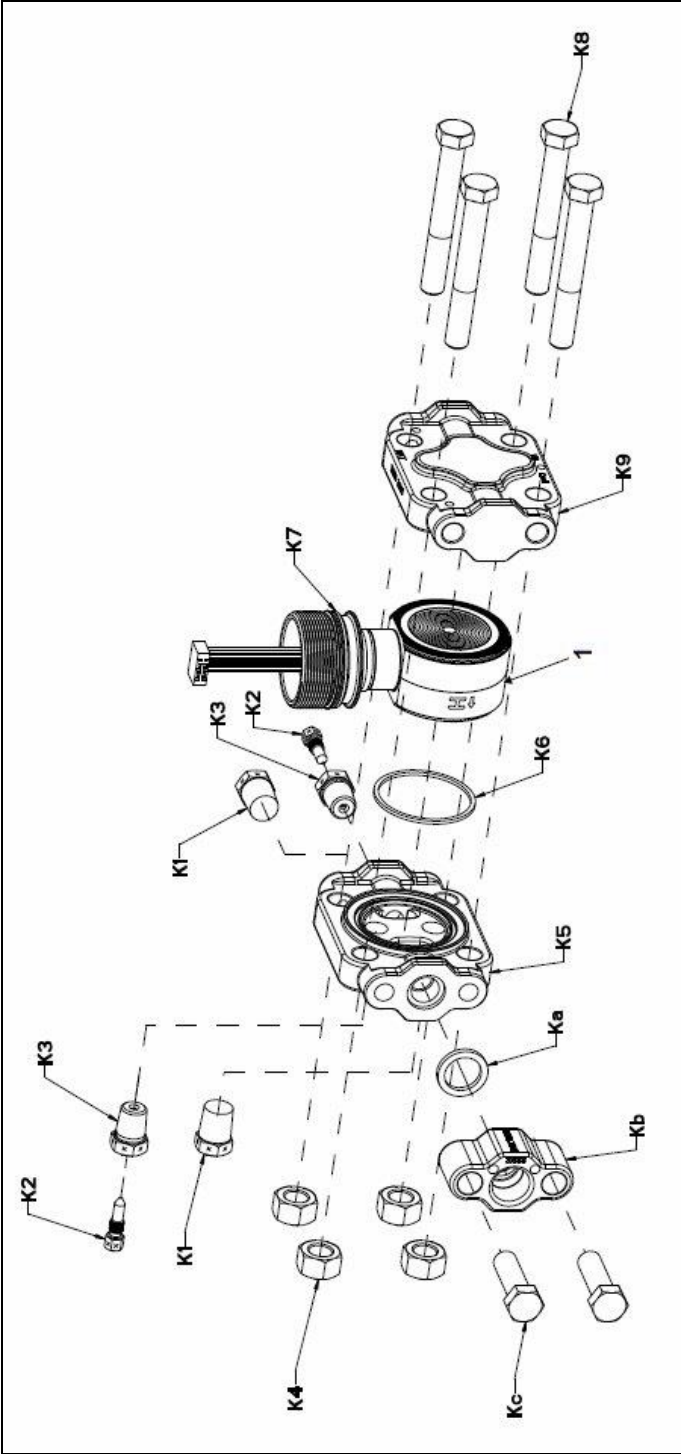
STGW830, 840, 870, and STAW822, 840 Transmitter Body
